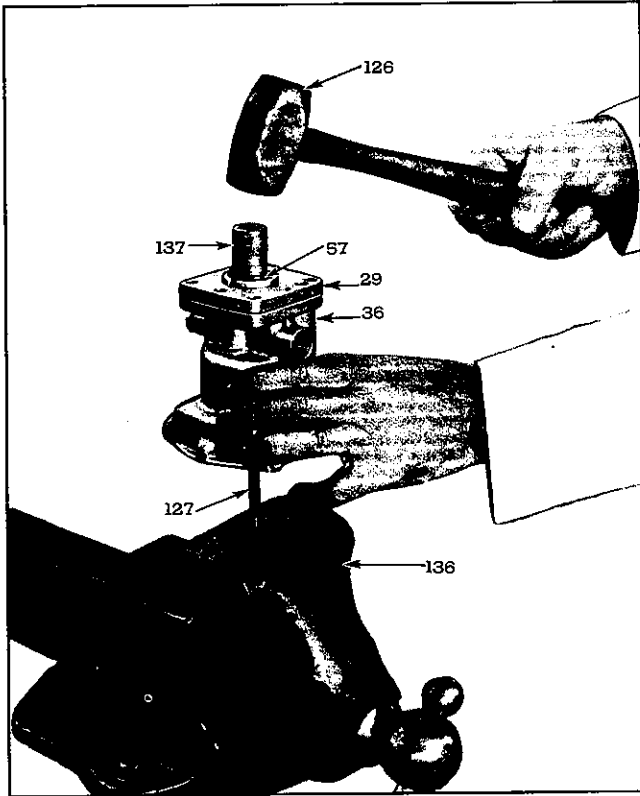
Replacing Drive Shaft Collar on Drive Shaft of Ballhead.
